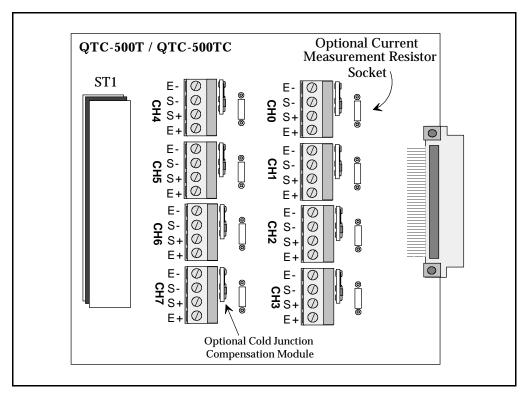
QTC-500T /QTC-500TC Terminal Board
